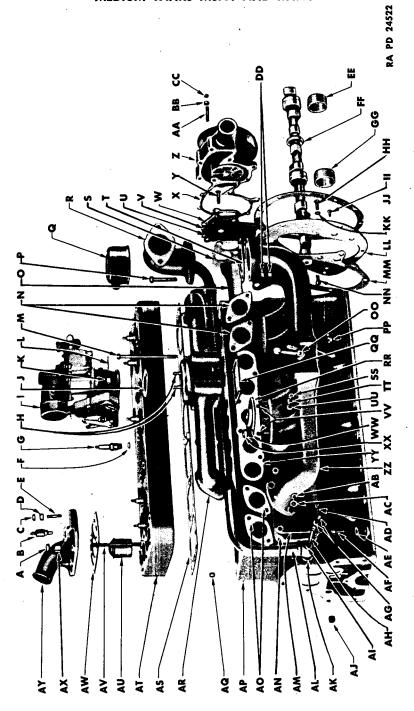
No. 1 Engine (Multiple Water Pump Type), Partially Exploded
